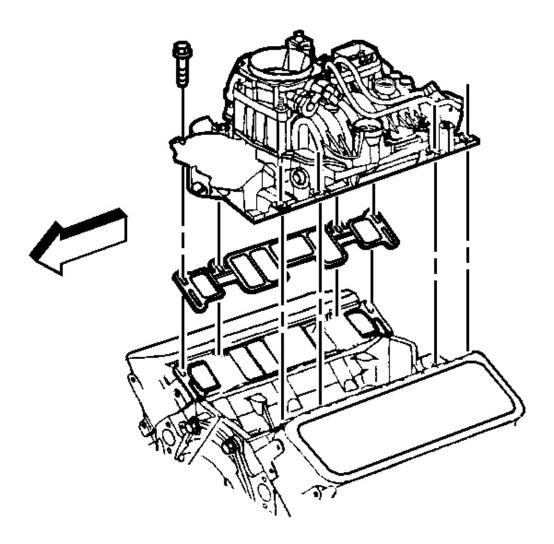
View Of Intake Manifold Assembly & Bolts Courtesy of GENERAL MOTORS CORP.
